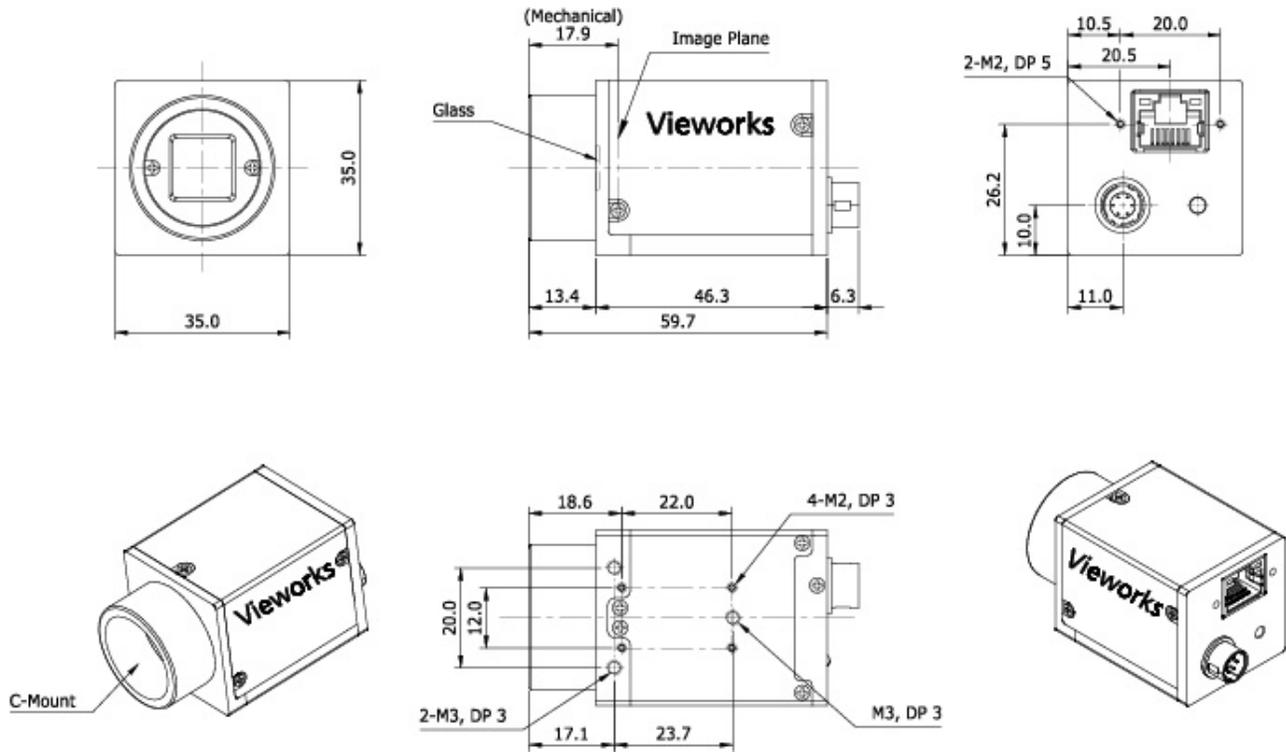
VQ-5MG-16 C-mount Mechanical Dimension
